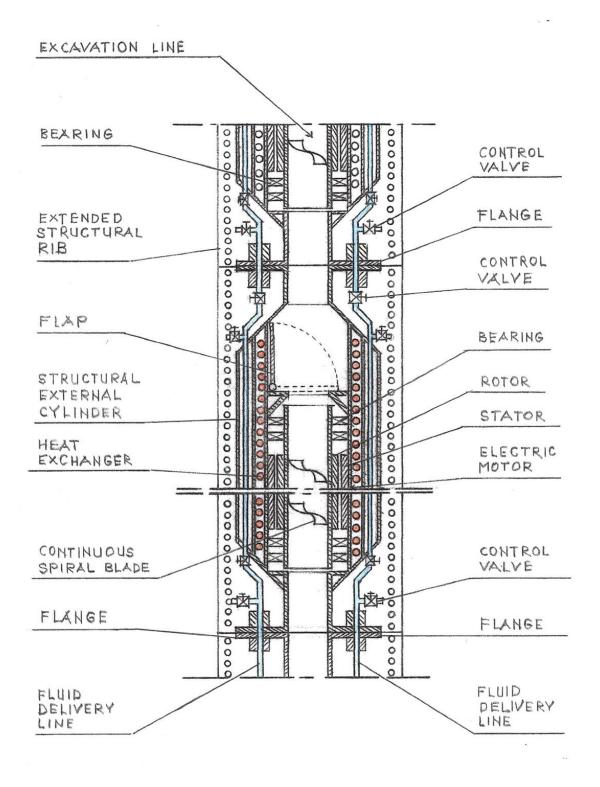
Cross-sectional View of an Excavation Line of the apparatus for Drilling Faster, Deeper, and Wider Wellbore
